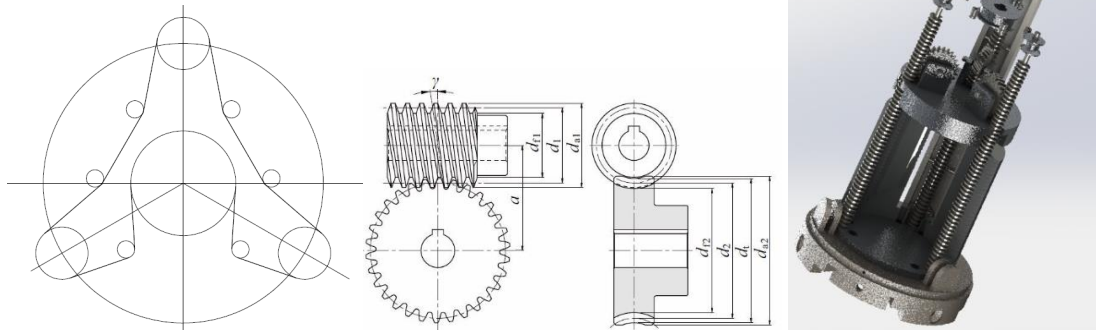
| Belt assembly, worm gear-wheel pair and their assembly in the module
